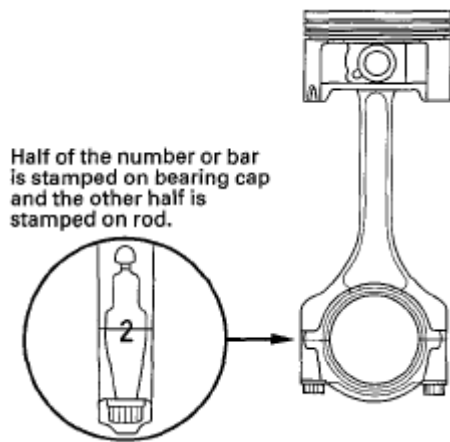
Identifying And Locating Connecting Rod Journal Code (1 Of 2)
